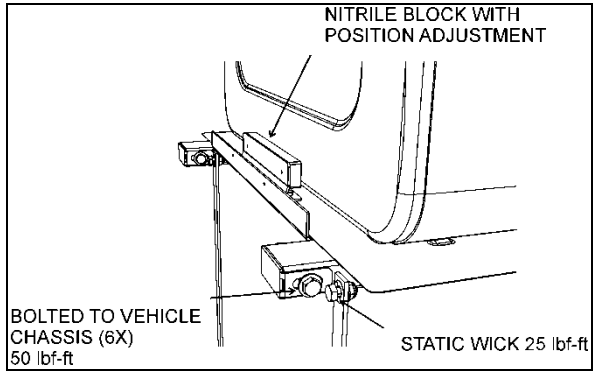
FUEL TANK SUPPORT MOUNTING BOLTS
